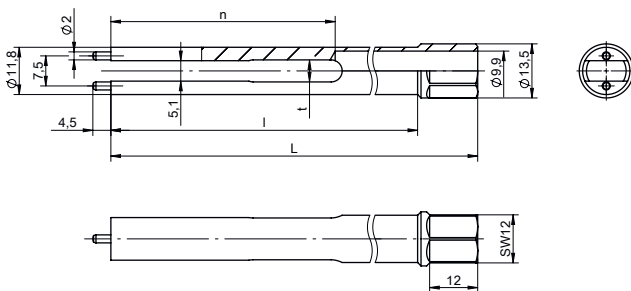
Mounting key for bore $\varnothing 12$ SW12
